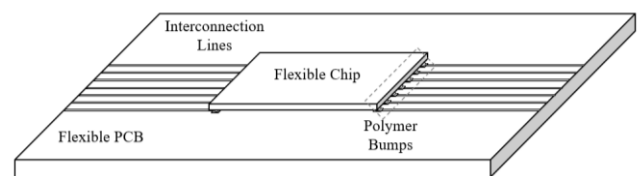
The structure of the designed flexible chip on the flexible PCB. The flexible chip is attached on the PCB with the polymer bumps.
